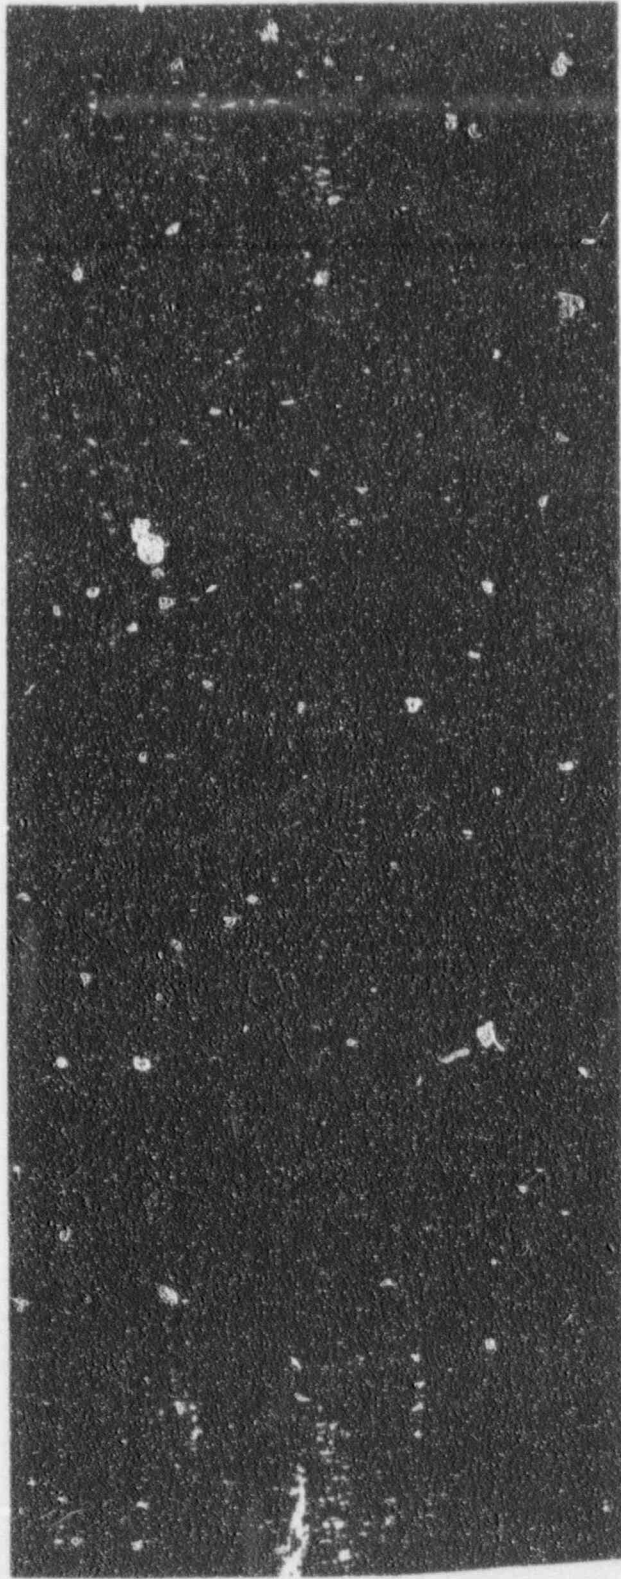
Secondary Cracks Near the Burst Failure in the Tube R96L116 EC2 Specimen (5X).
